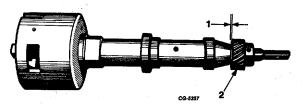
Checking Distributor Shaft End Play (Thrust Washer-to-Gear Clearance)
